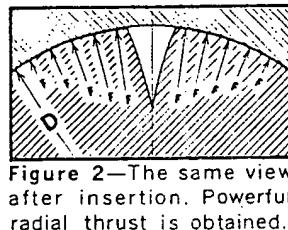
The same view after insertion. Powerful radial thrust is obtained.
